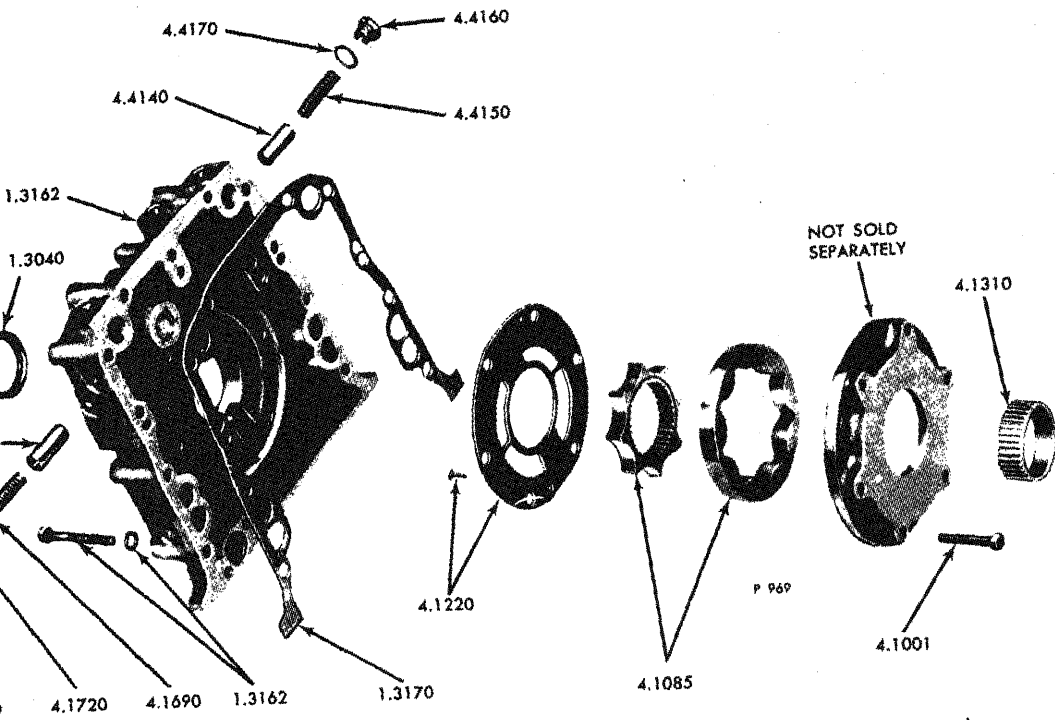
A OIL PUMP AND PRESSURE REGULATOR (Inline Engine)
